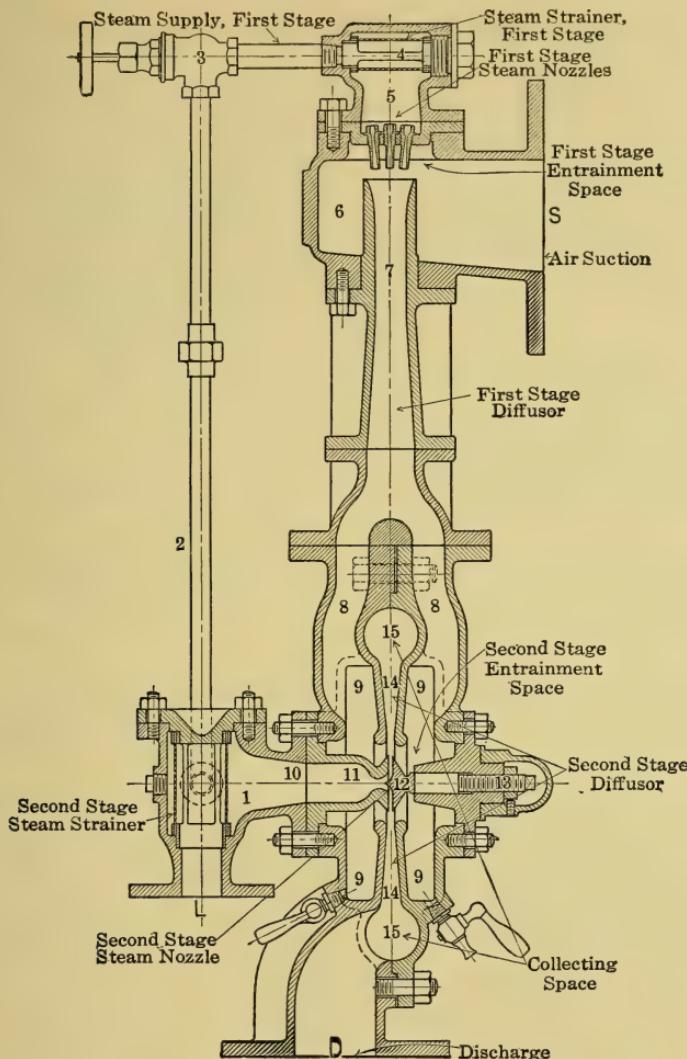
Cross-sectional View of the Radojet Vacuum Pump.
